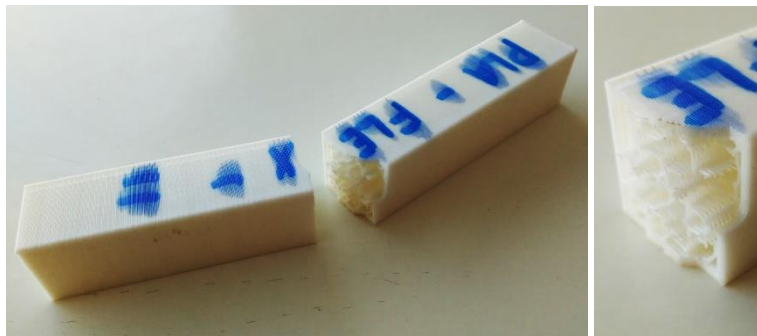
Part displaying fracture after flexural stress test – strains parallel to force: a (left) a typical fracture, b (right) close-up showing infill deformation.
